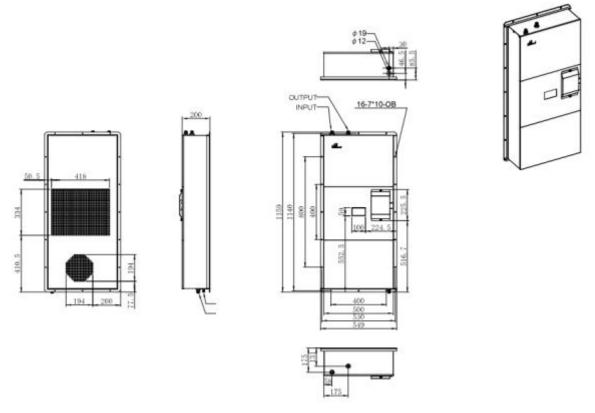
Overall dimension drawing of water chiller (unit: mm)
